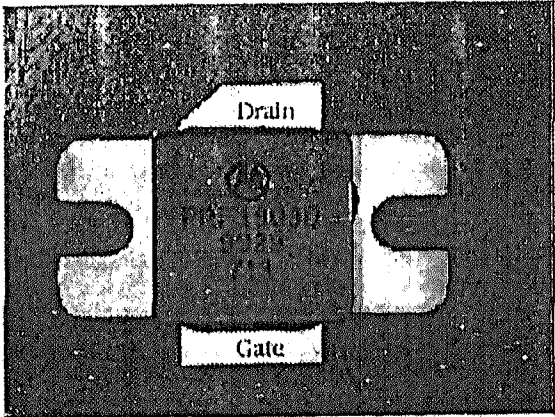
Optical view showing B MRF19030 device prior to ceramic lid removal. This devices is housed in a micro400 package that have a smaller package case outline as compared to A 10035 device
